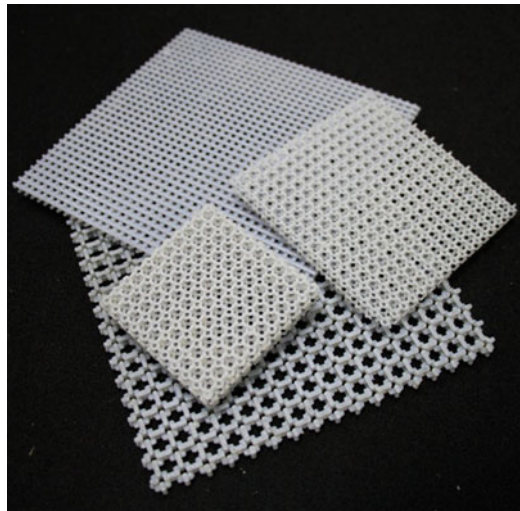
Samples of FSSs with 3D unit cells fabricated by 3D printing
